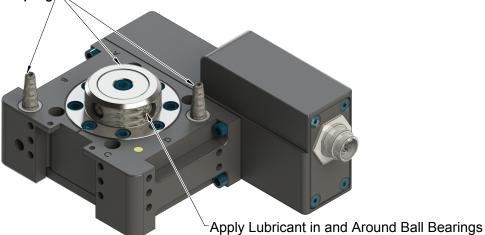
Cleaning Ball Bearings of Locking Mechanism
